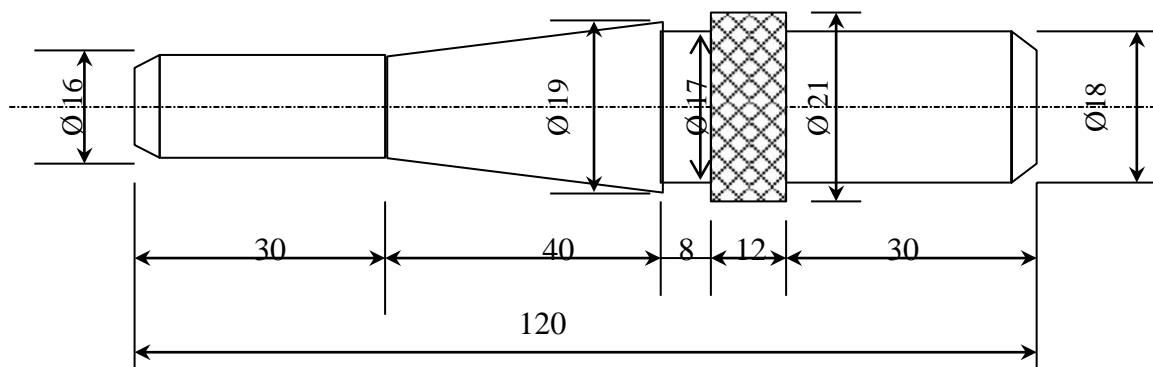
(b): All Dimensions are in mm (Tolerance ± 0.5 mm on lengths; ± 0.1 mm on diameters)
